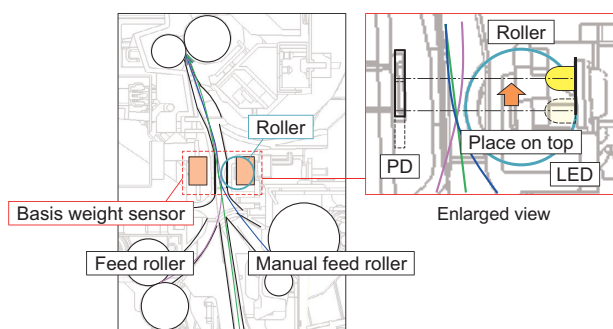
Layout of optical basis weight sensor, and rollers on paper feeding path of OP machine.
